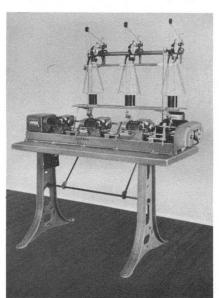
A Universal Hi-Speed No. 102 Coil Winder.
